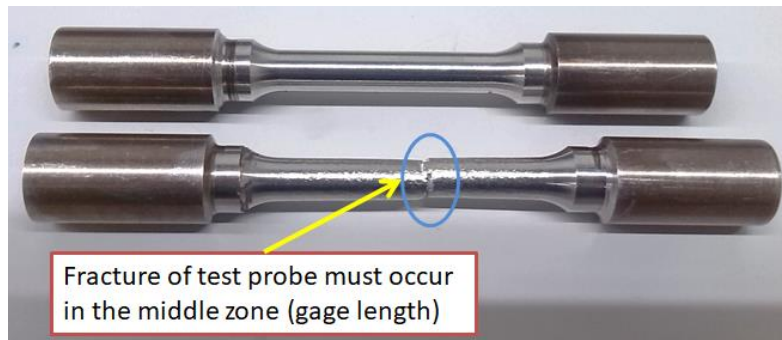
Top; coated specimen prior to uniaxial tensile test. Bottom; specimen after test. The rupture has occurred in the middle zone of the specimen, within the calibrated zone designed to calculate the deformation of the probe at fracture.
